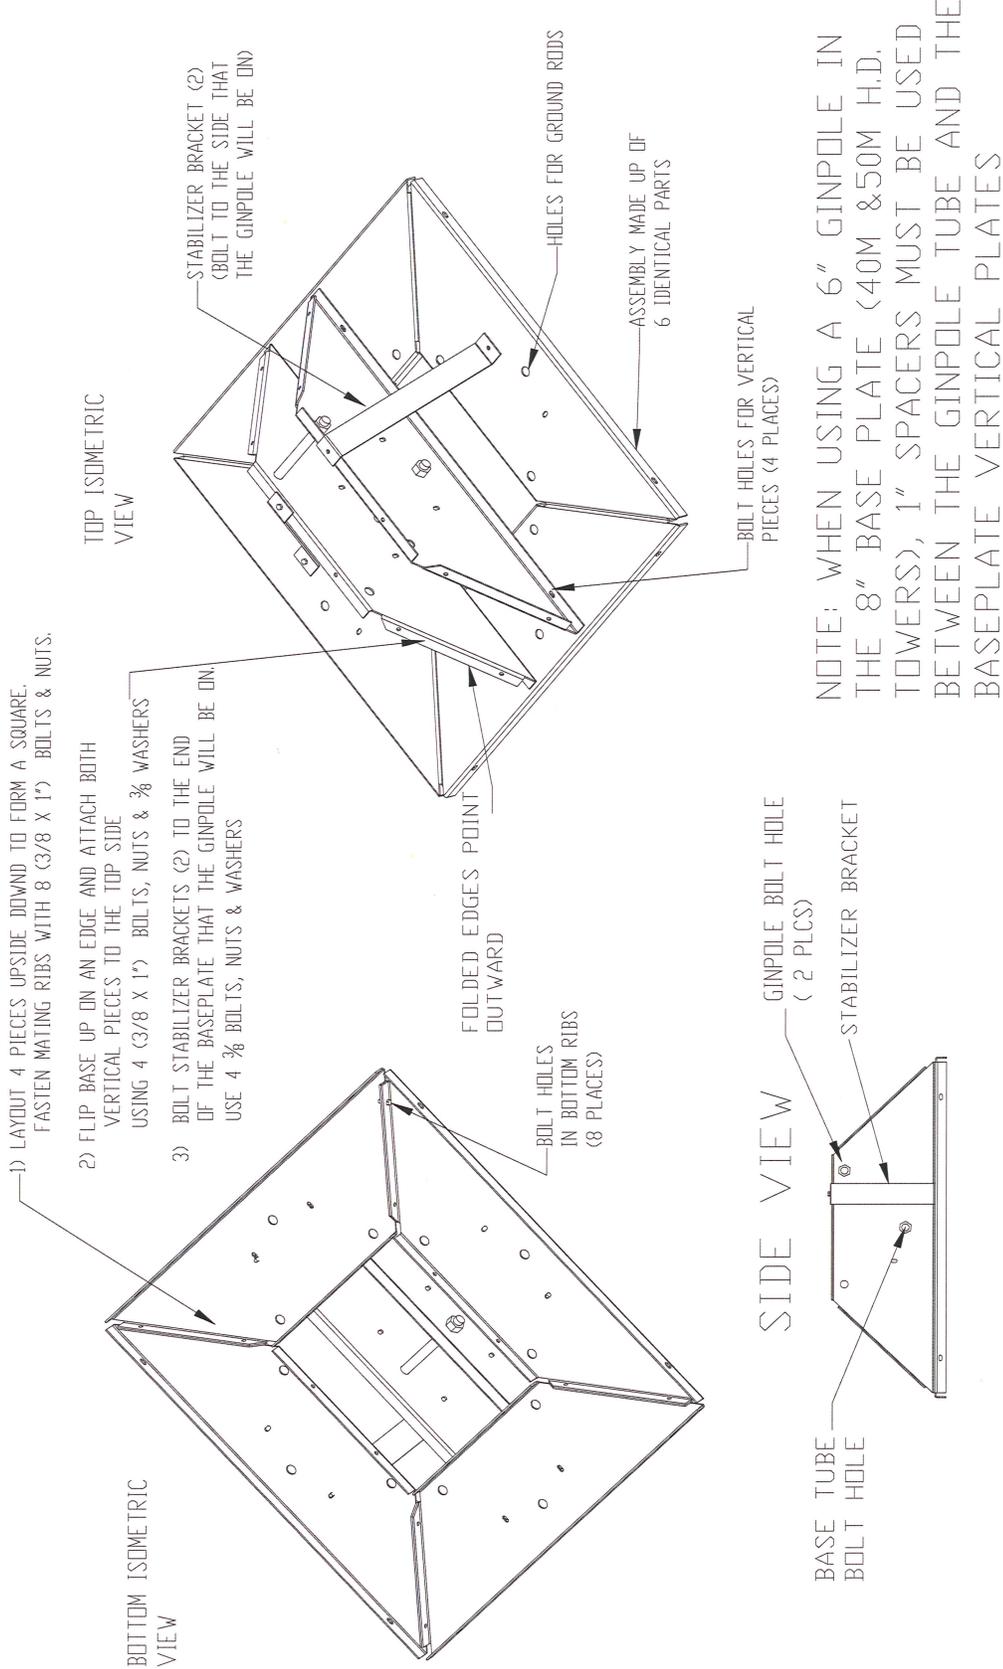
TallTower Base Plate Assembly (for 6 inch and 8 inch dia. towers)
